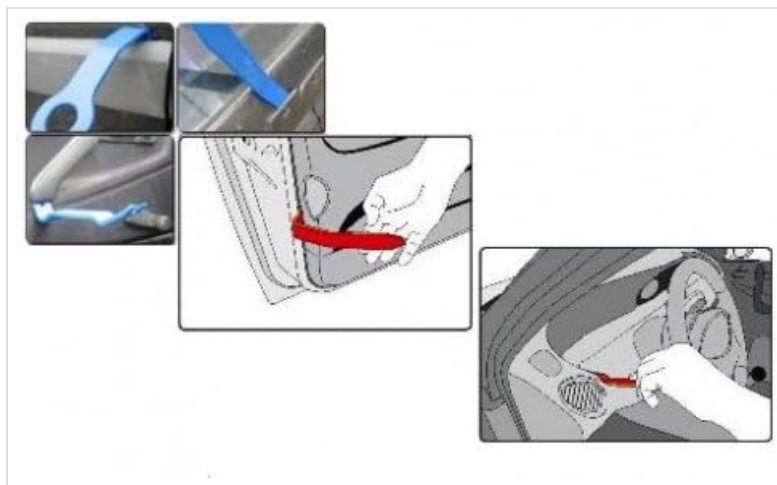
Illustrative examples of the tools being used to remove car door panels and dashboard trim.
